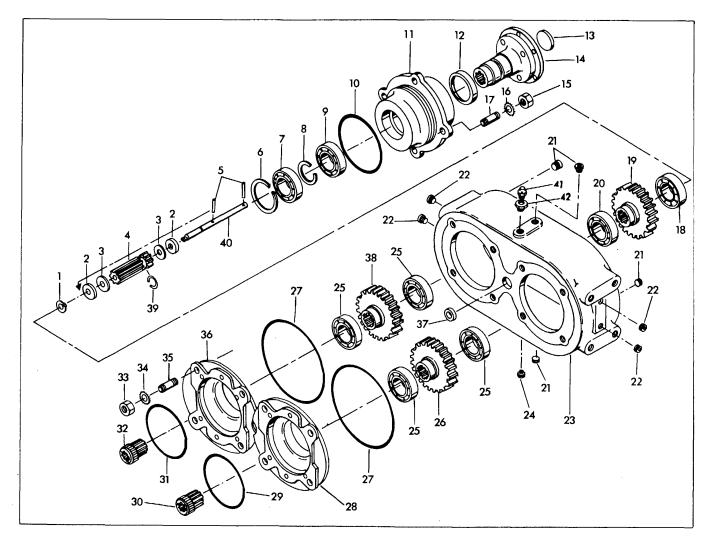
Constant Speed Pump Drive Disassembly.
